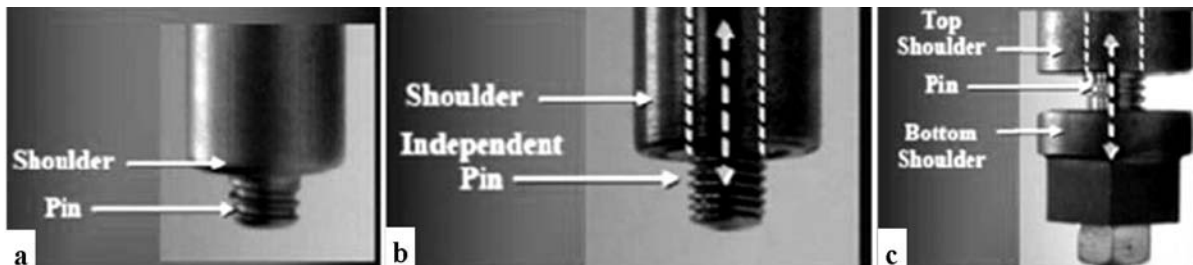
FSP different types of tools. a) fixed, b) adjustable, c) bobbin
